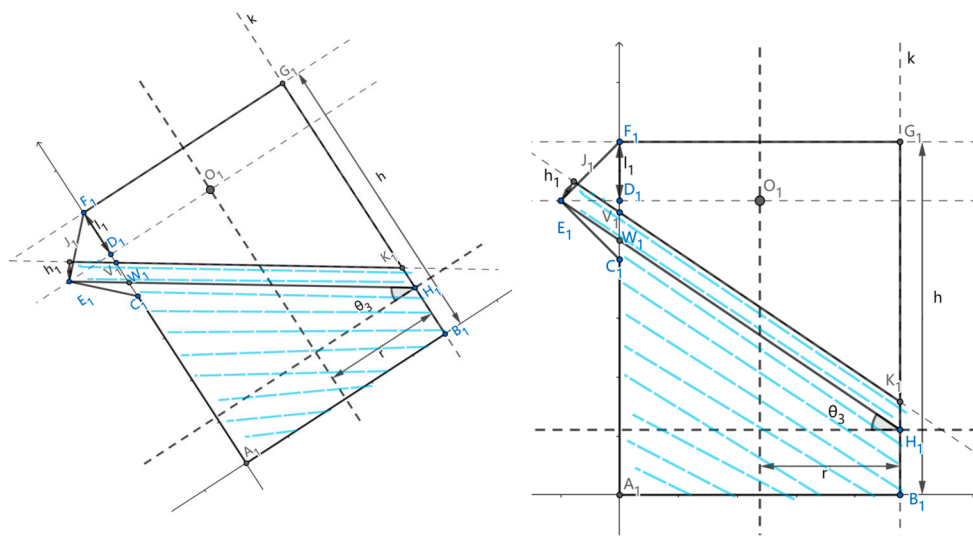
Casting analysis of the first stage of casting of the casting ladle.
